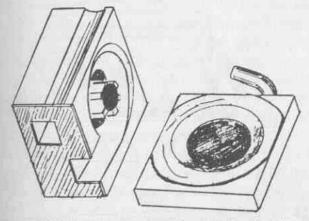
A Unit-block Broken Apart to Show the Pouch. This is of the "upright" Type, with the Pouch Underneath the Valve.
